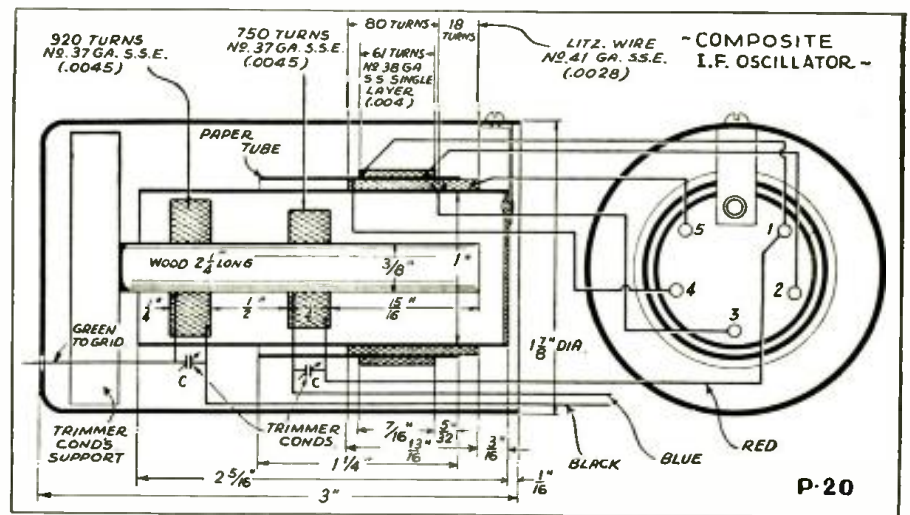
Constructional details for the composite I.F. and oscillator tuning coil unit.
